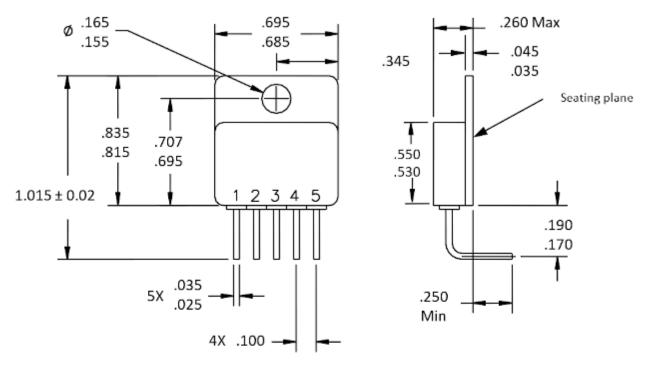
Surface Mount Lead-Bend (-1 Option)
